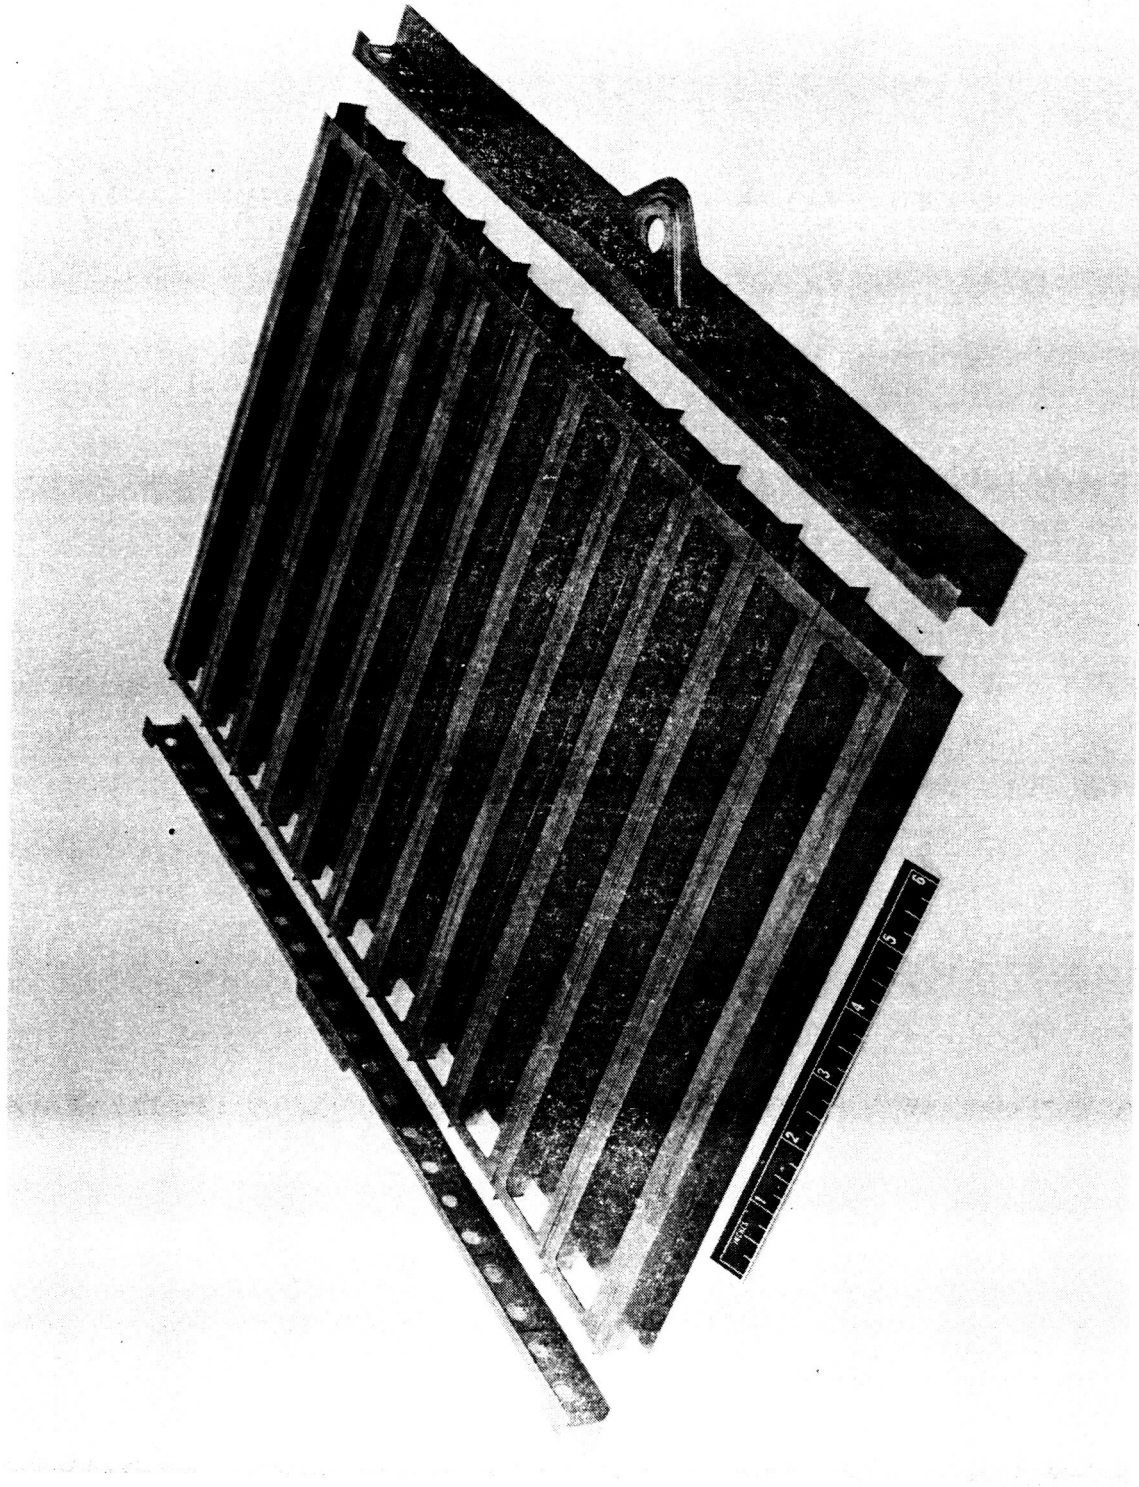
Tee-Stiffened Cb-752 Heat Shield Panel — Interior Side Prior to Final Weld (Photo No. 128070B)
